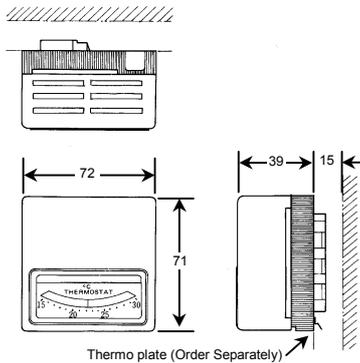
Dimensions in mm.-without baseplate and mounting plate model
